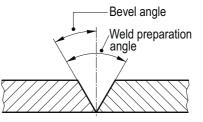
Definition of bevel angle and weld preparation angle (schematic)
